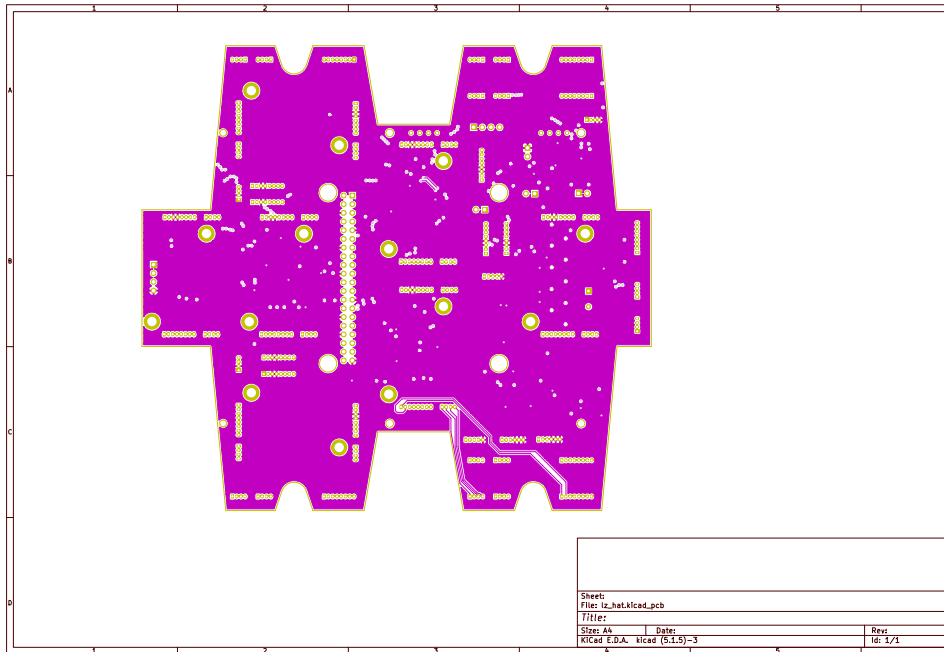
KiCAD PCB Design Second Middle-Layer Layout
